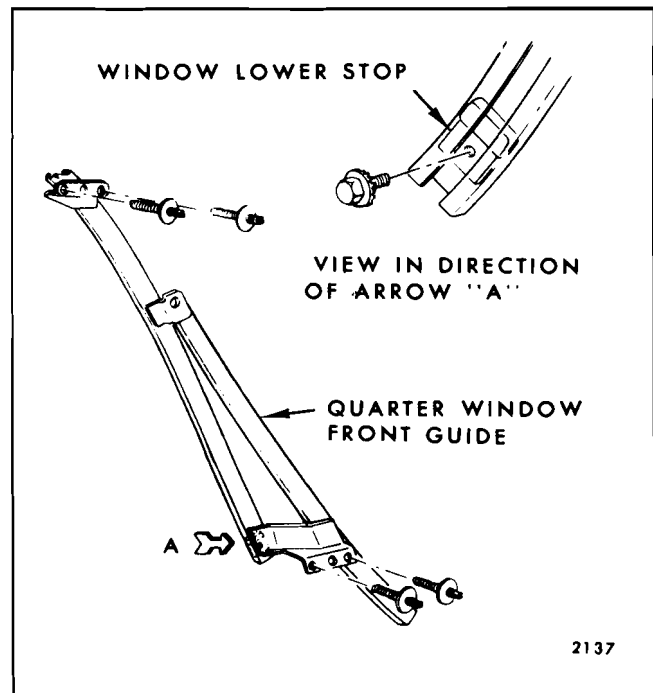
Rear Quarter Window Lower Stop Adjustment - Styles so Equipped
